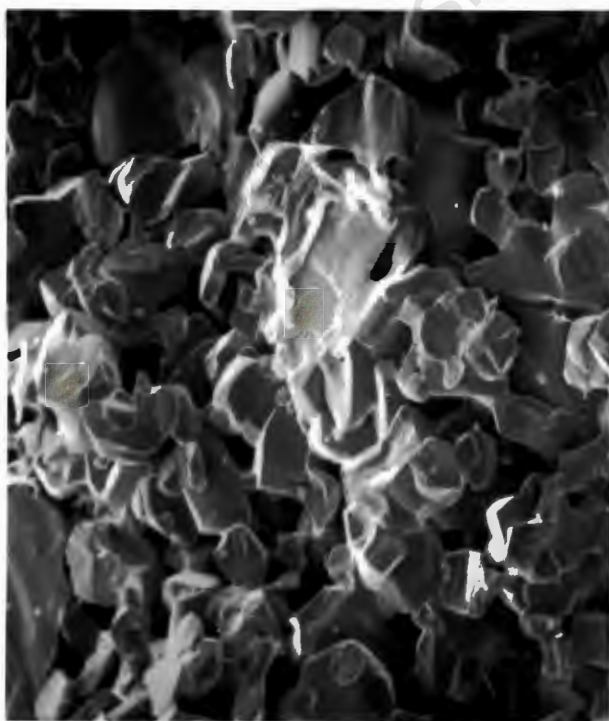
and Figure 5.11: Fracture surface of the hot section Kanthal Hot Rod heating element, after sintering. Magnification = 80X and 1250X.
